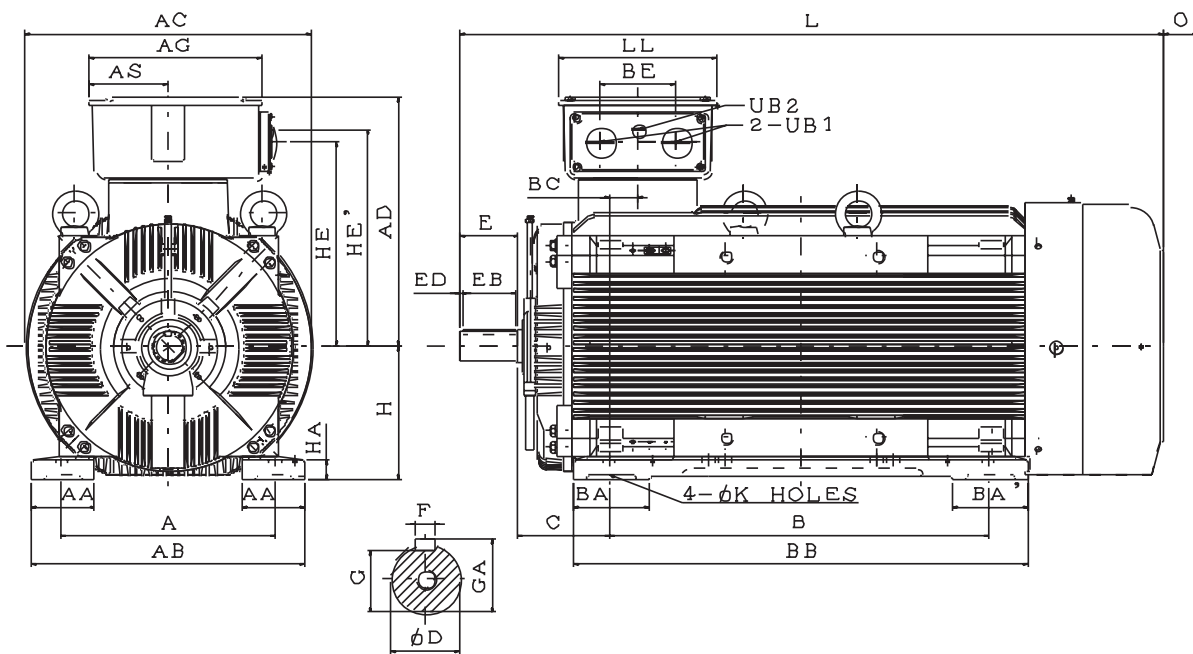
Outline drawing of cast iron design, feet version, mounting B3; frame size 315DA-315DC
